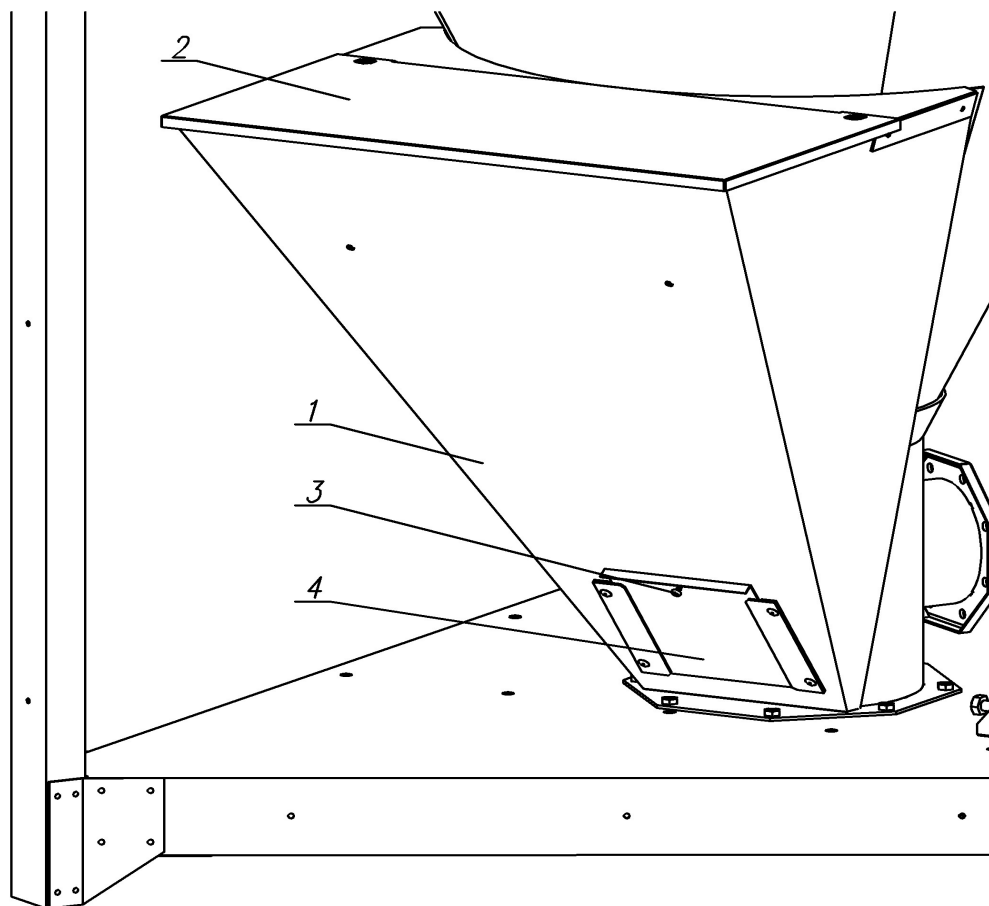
Intake socket: 1 – intake socket, 2 – socket cover, 3 – shutter screw, 4 – shutter
